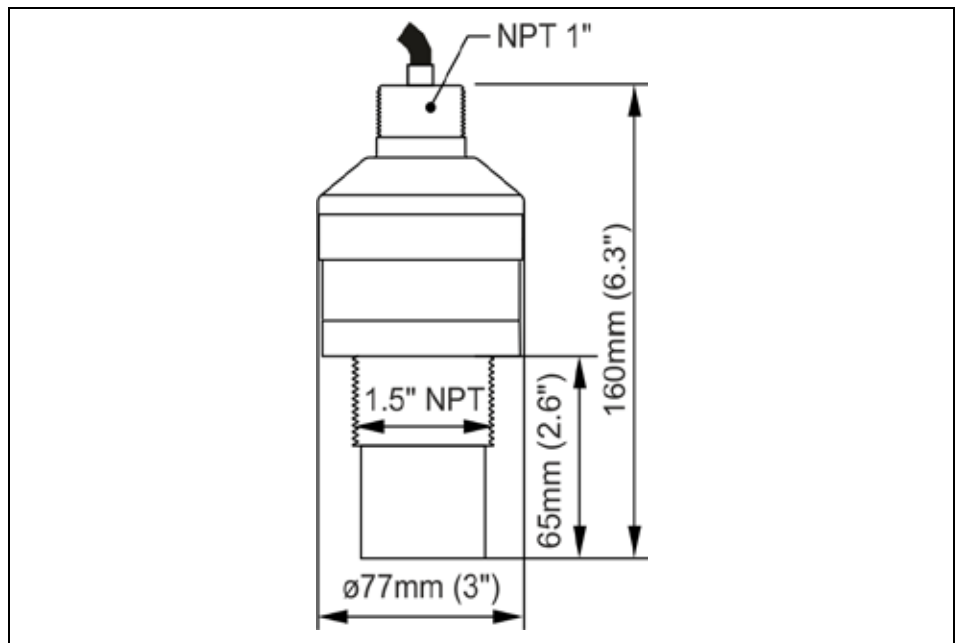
Sensor dimensions i-03 and i-06, front tread mount
